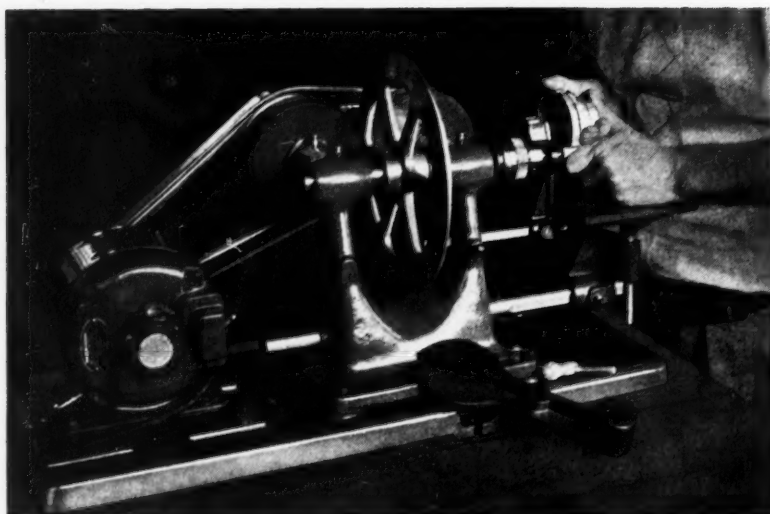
Horizontal Reversing Bench Tapper with Friction Drive
